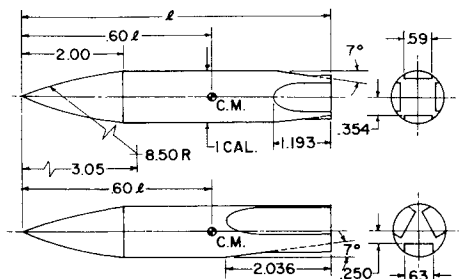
Added lifting surfaces, dimensions in calibers ($l = 5, 6, 7$).
